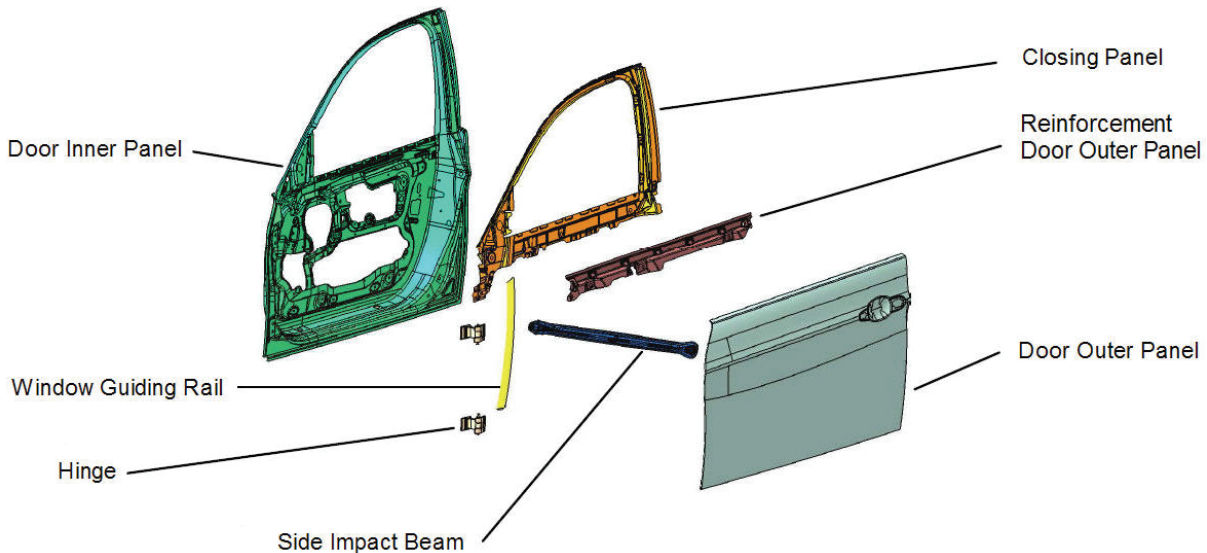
Frame door concept in steel layer built design (Leinweber, 2007)
